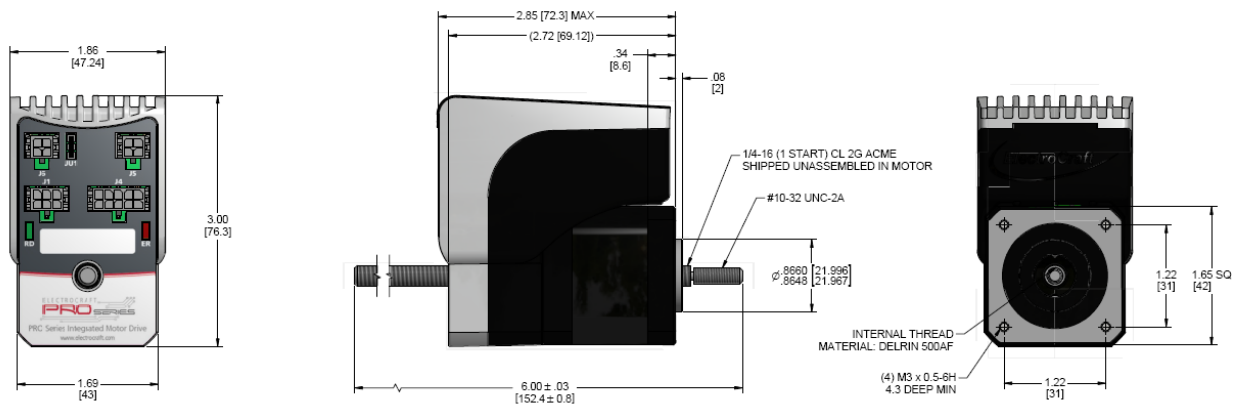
PS42-A44V48A-0AB4-X-CAN mechanical dimensions.
